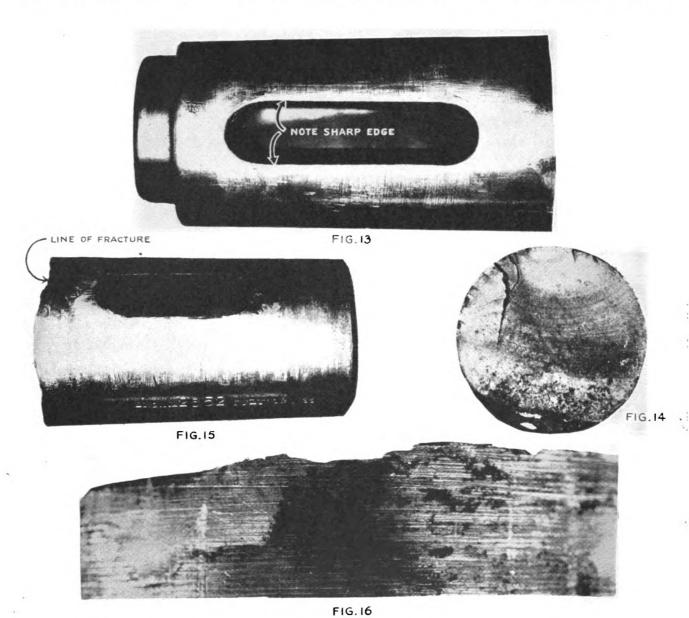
Piston rod broken through taper fit; apparently caused by a combination of file marks on the finished surface of the taper fit and stress-corrosion. Figs. 14 and 15—Fractured piston rod in which fatigue cracks started from several tool marks, finally joining as the break progressed. Fig. 16—An enlarged view of a broken piston rod, showing how the cracks progressed along the line of the tool marks
